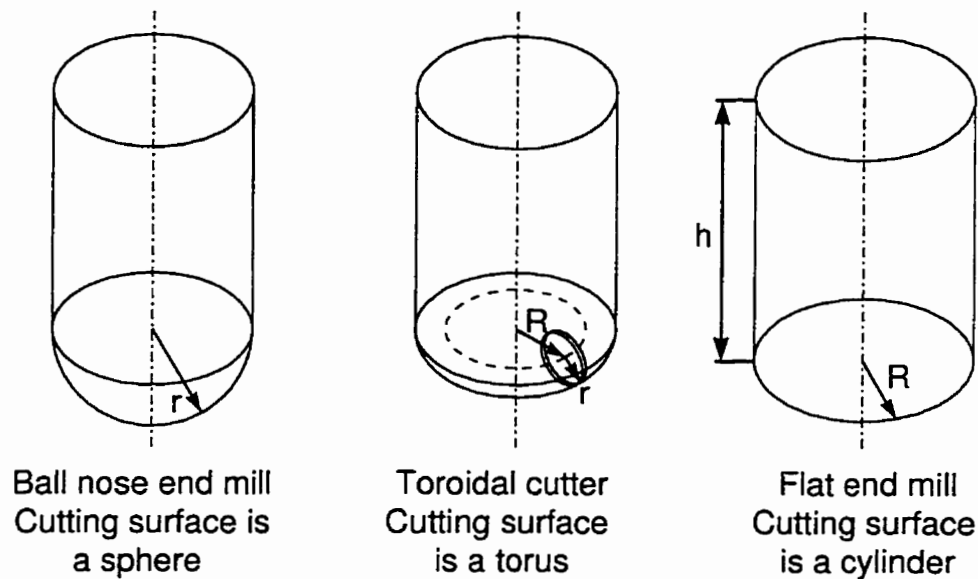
Cutting tools typically used for 5-axis surface machining.
